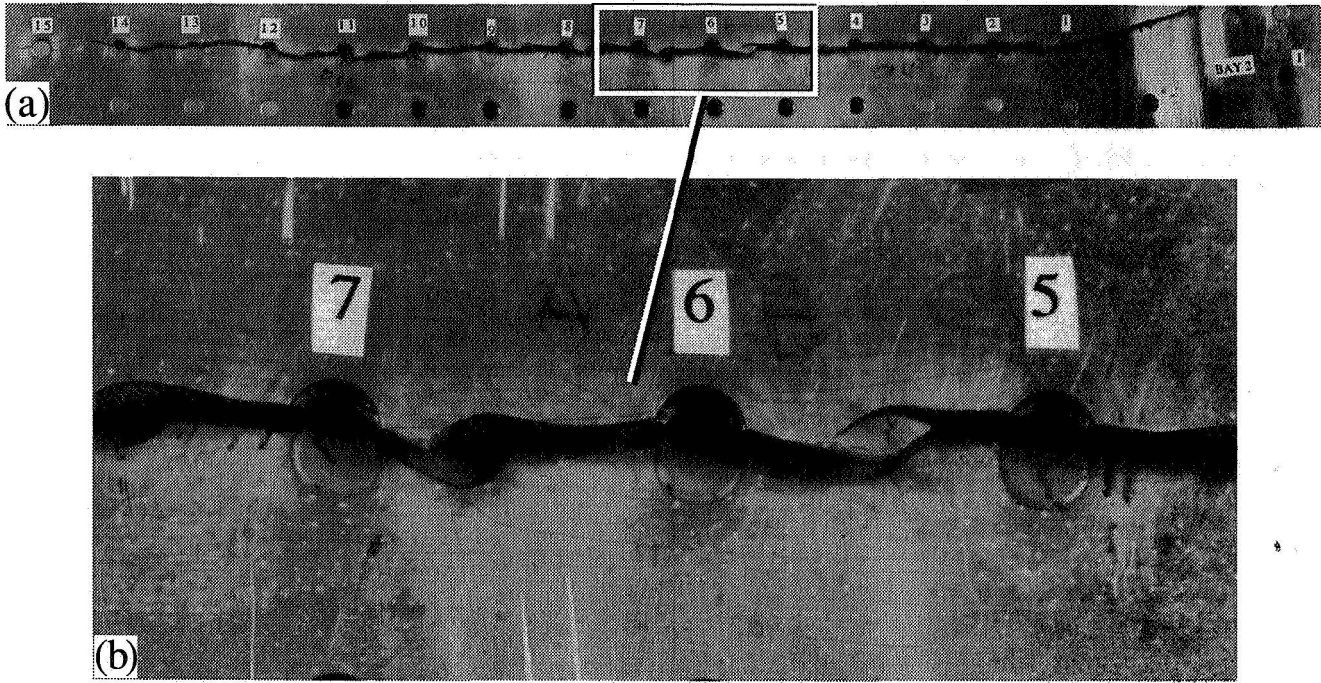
Photographs showing the fatigue cracking after link-up in bay #1 lap splice joint.
